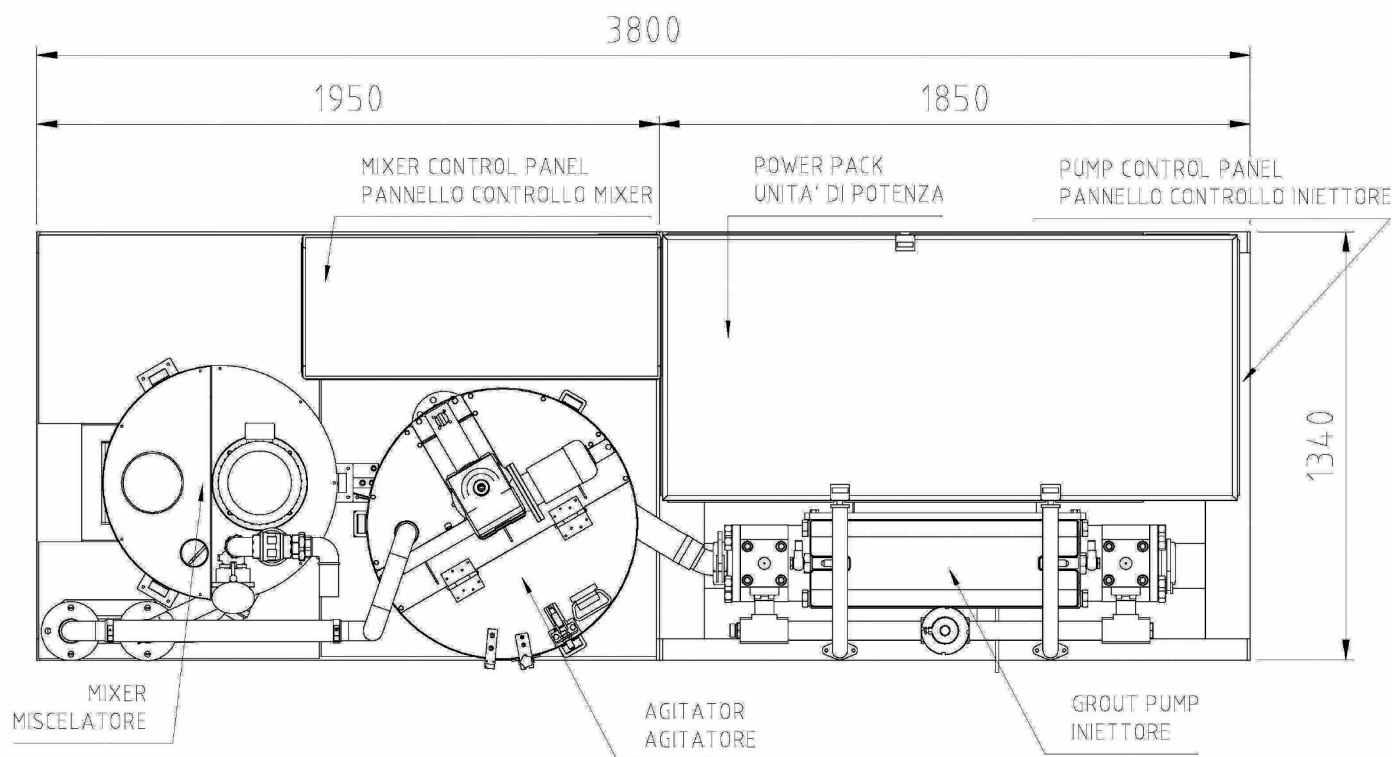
"MINIJET" COMPACT UNIT - schema planimetrico / plan layout.
